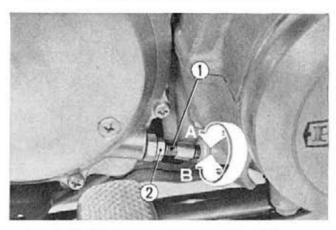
① Clutch cable adjusting bolt ② Lock nut
